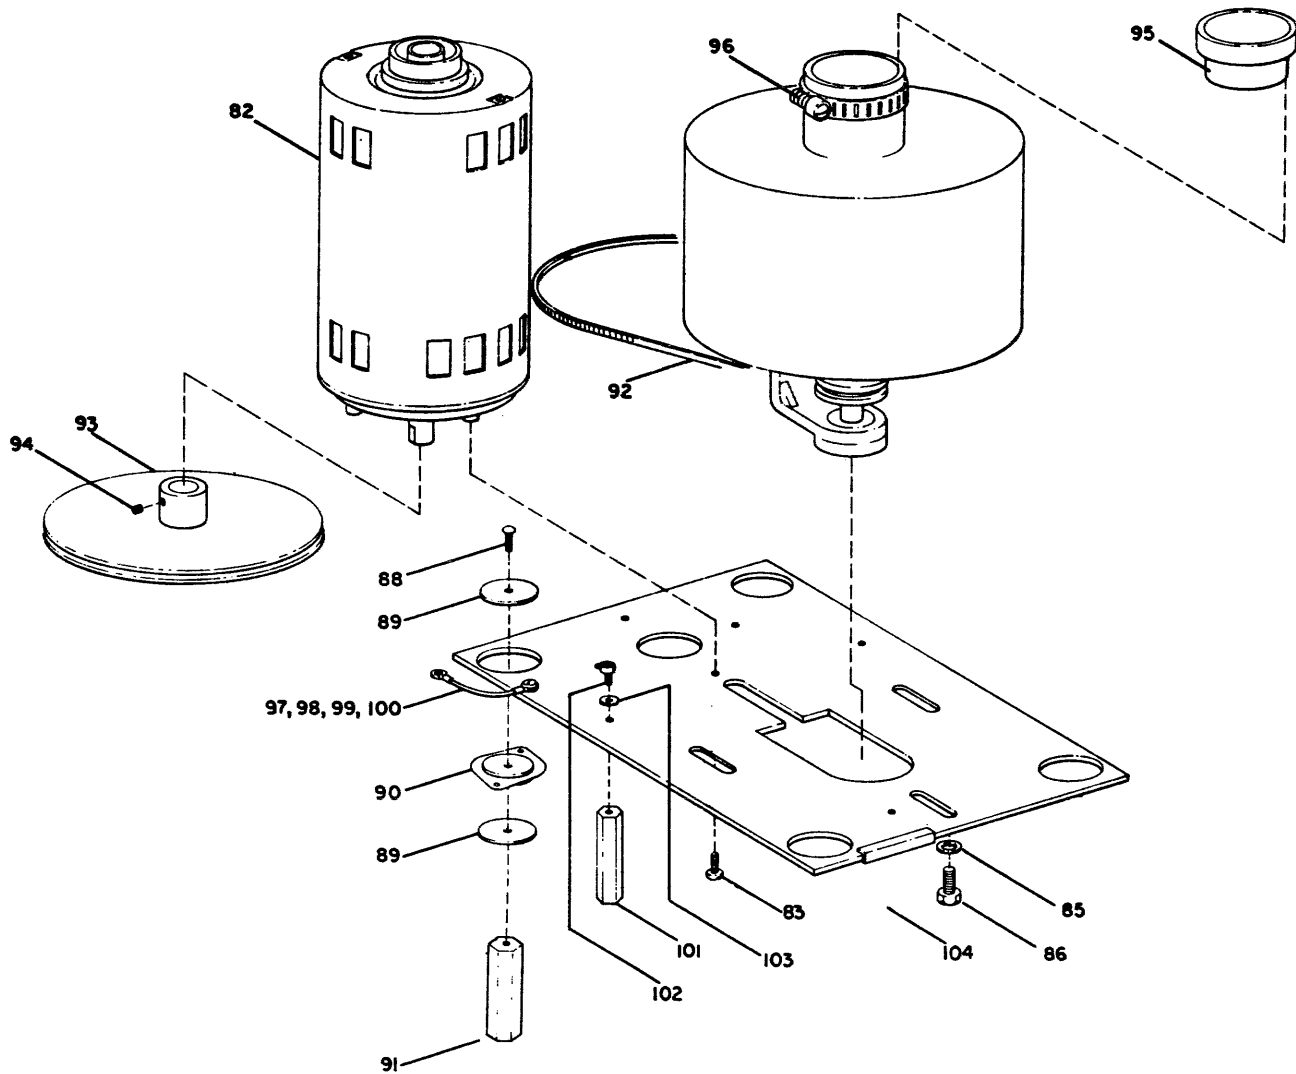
TRIM GROUP ASSEMBLY (sheet 6 of 6)
